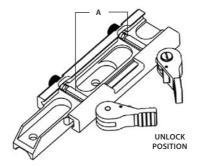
CO-LR MOUNT. UNDERSIDE VIEW
